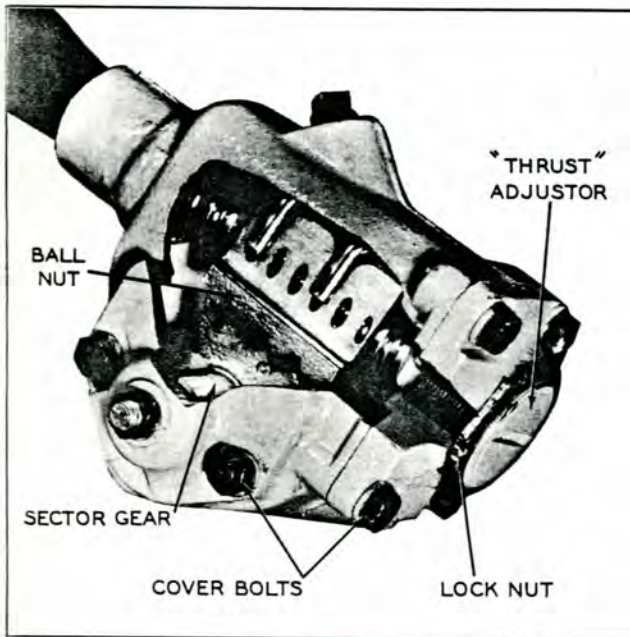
Steering Gear Thrust Adjustment (Worm Bearings)
